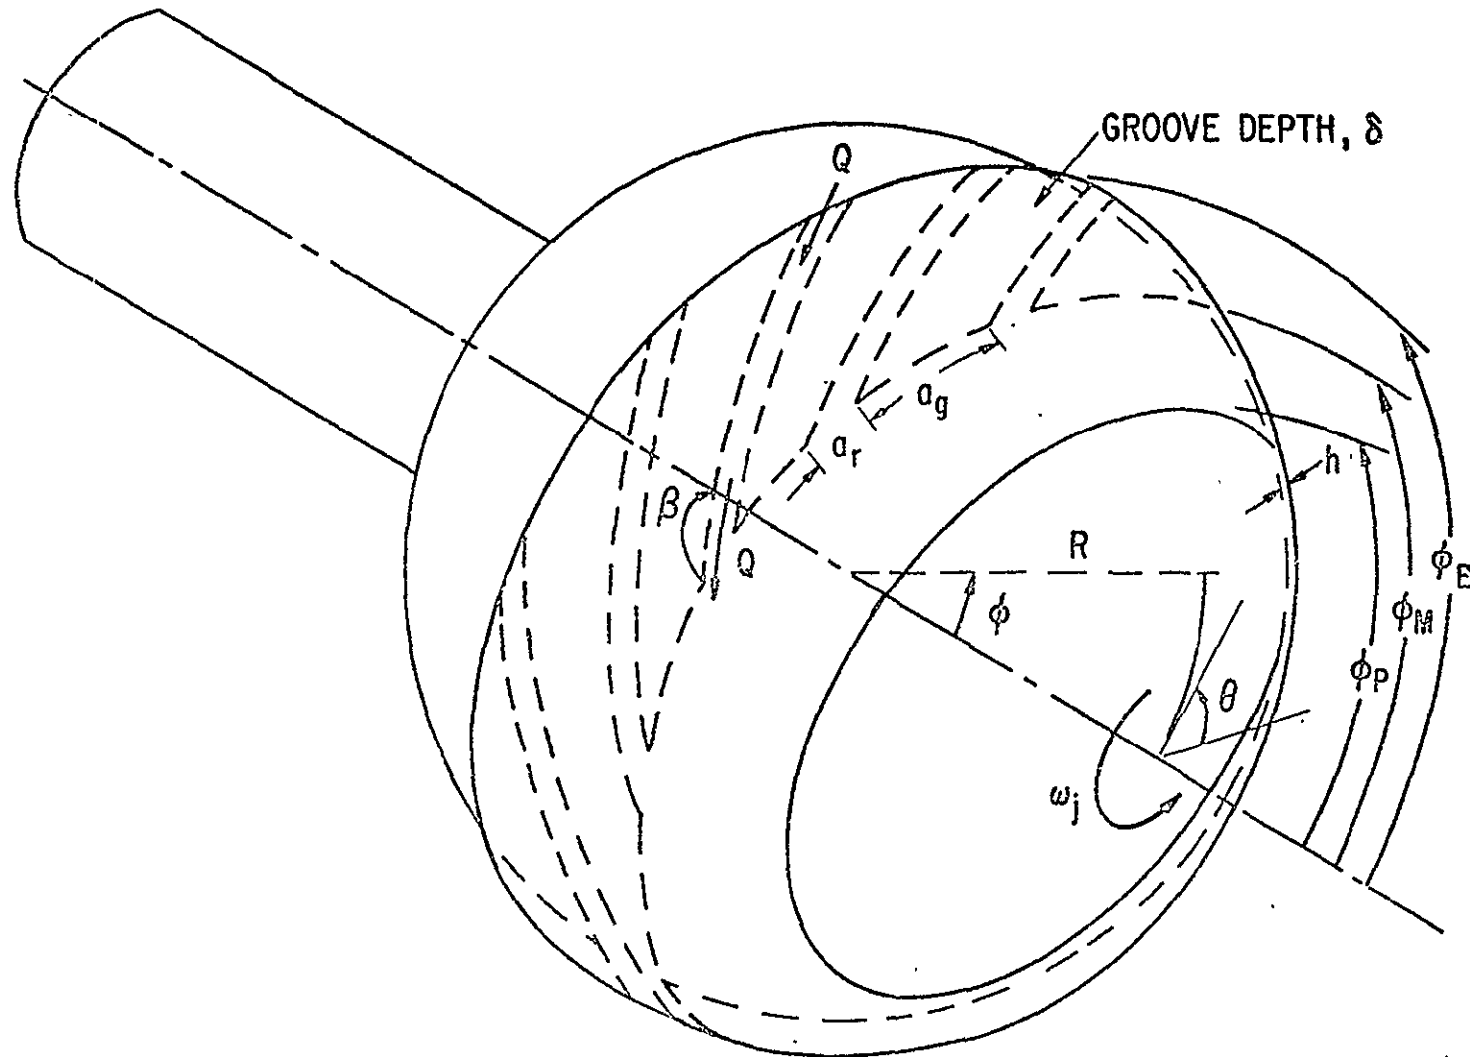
Schematic of a Spiral-Grooved Spherical Bearing
